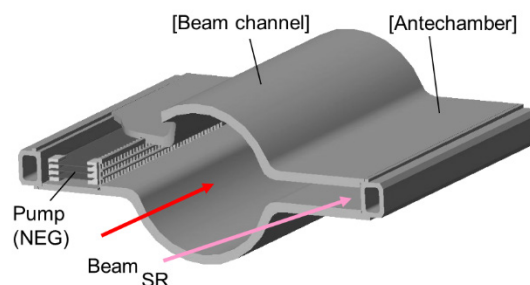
Typical cross section of a beam pipe at the arc sections for LER.
